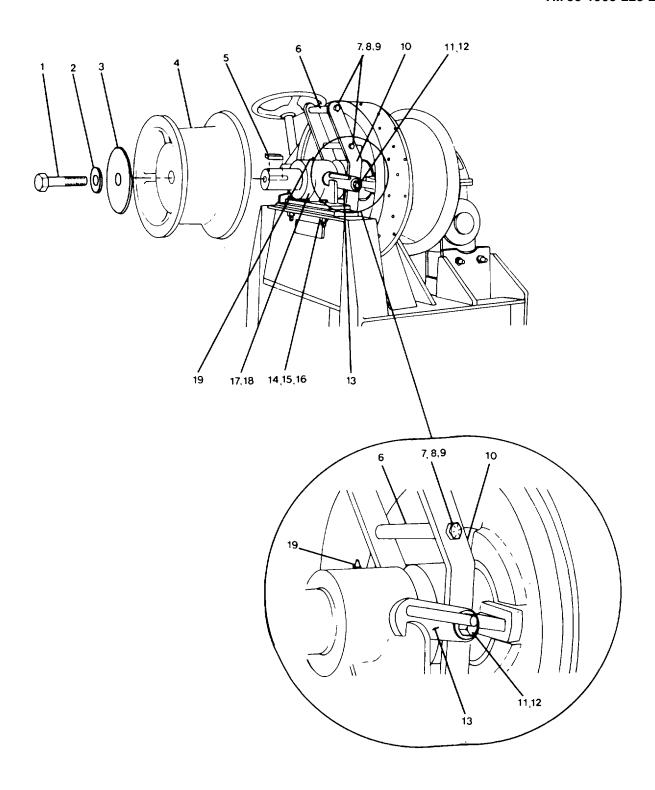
Bow Anchor Windlass Cathead and Clutch Components.
